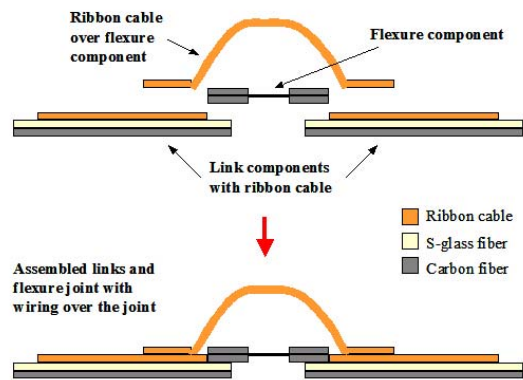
Components and assembly method to accomplish the wiring over the flexure joints.
